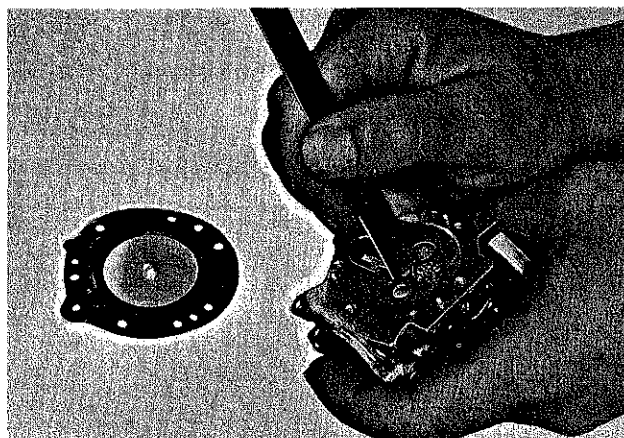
The position of the inlet control lever on Tillotson carburetors is checked by a straight-edge on the face of the body casting close to the lever cavity. Check the diaphragm for cracks, holes, and tears.
